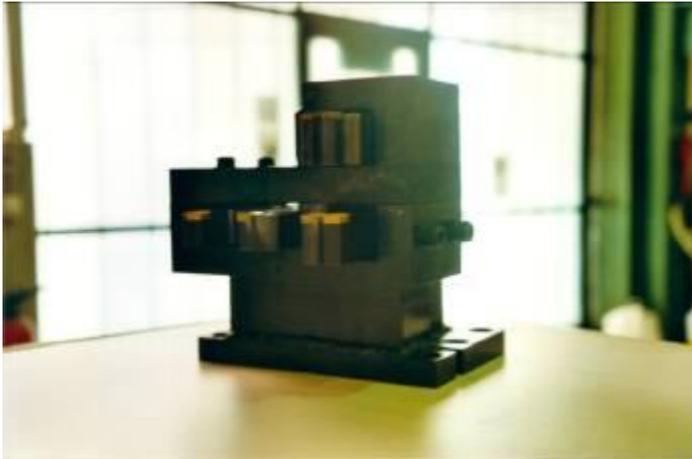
Robust WIAP steel bracket concept for planing a Waldrich planer.
